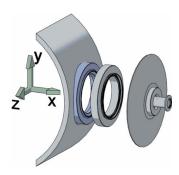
(Color online) Schematic 3D exploded assembly view of the RSX scuff probe positioner, showing KF-25 fitting on tapered disk. The y-z plane sliding action occurs on the double O-ring seal to the plastic insulator flange, which in turn is O-ring sealed to the vessel Conflat fitting.
